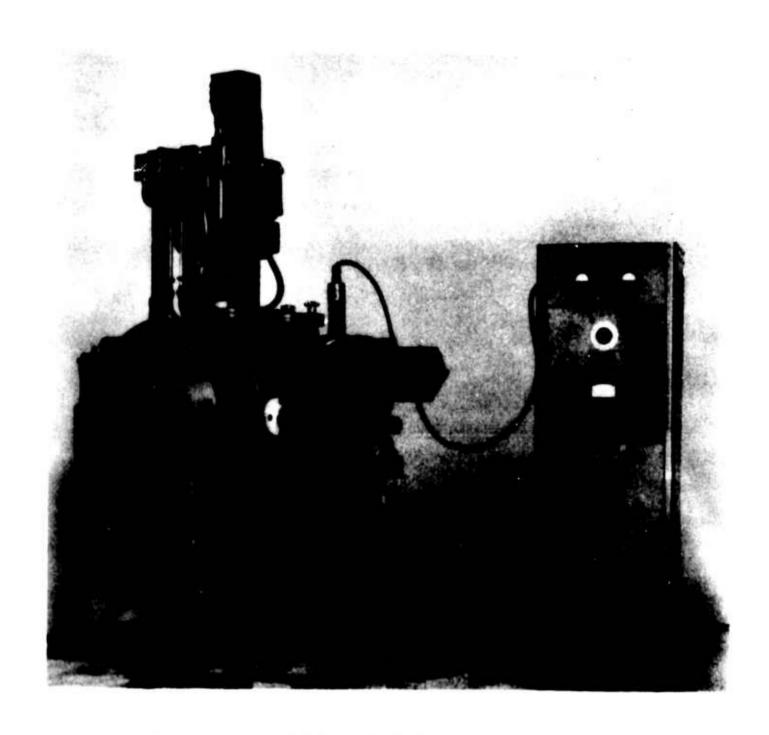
Arc Melting Skull-Casting Vacuum Furnace
